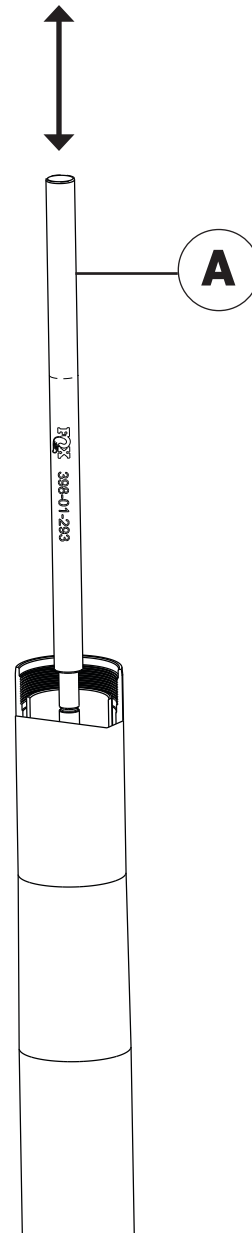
Cartridge shaft bleed tool installed (A); bleed air out of cartridge by cycling the shaft.
